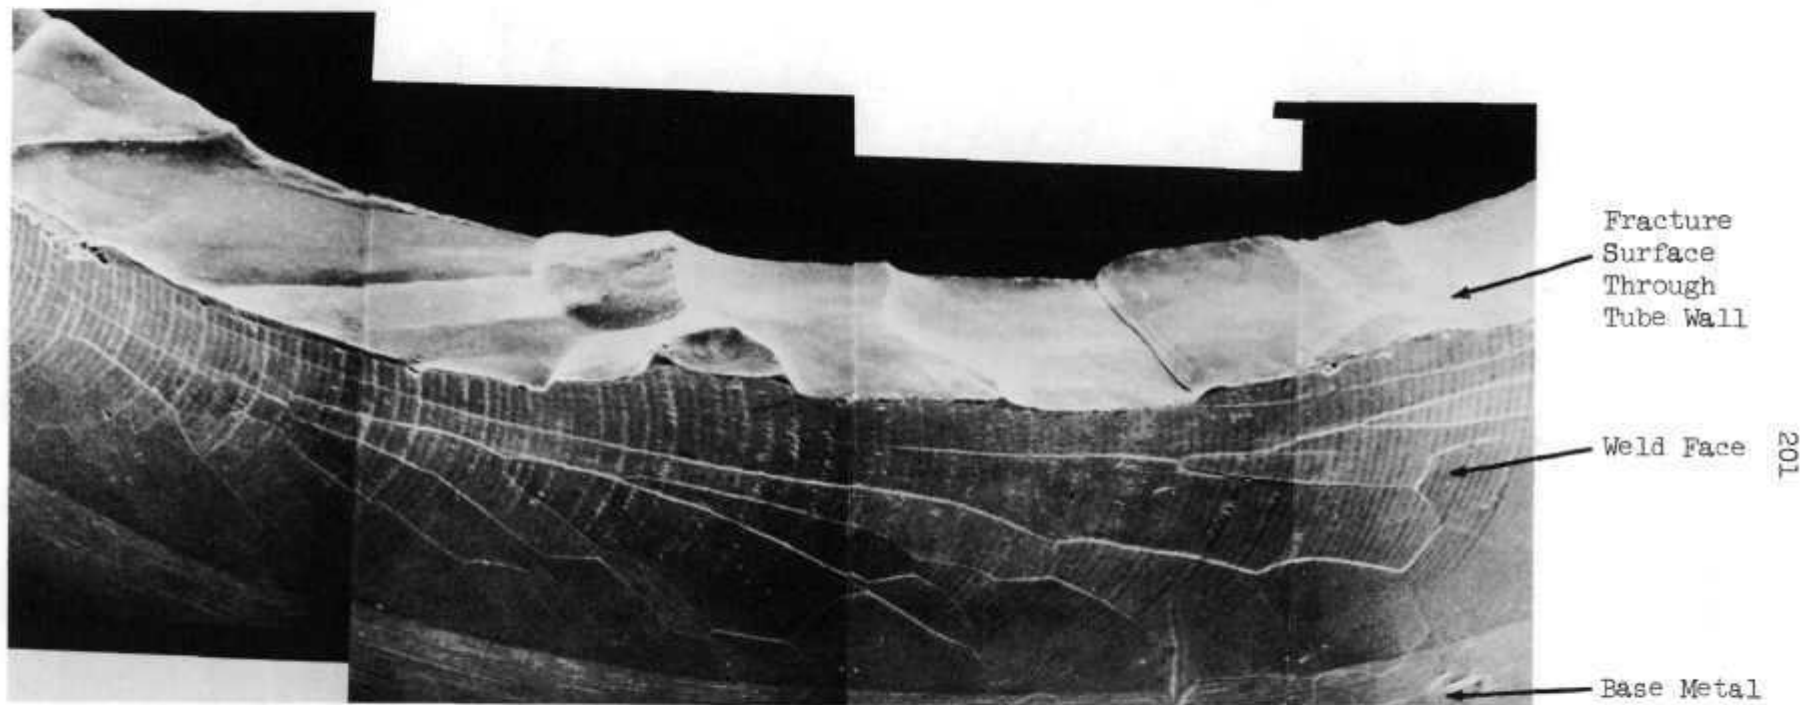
Scanning Electron Microscope Photograph of Gas Tungsten-Arc Weld and Fracture Surface in a Low-Carbon Molybdenum Tube. 80X.
